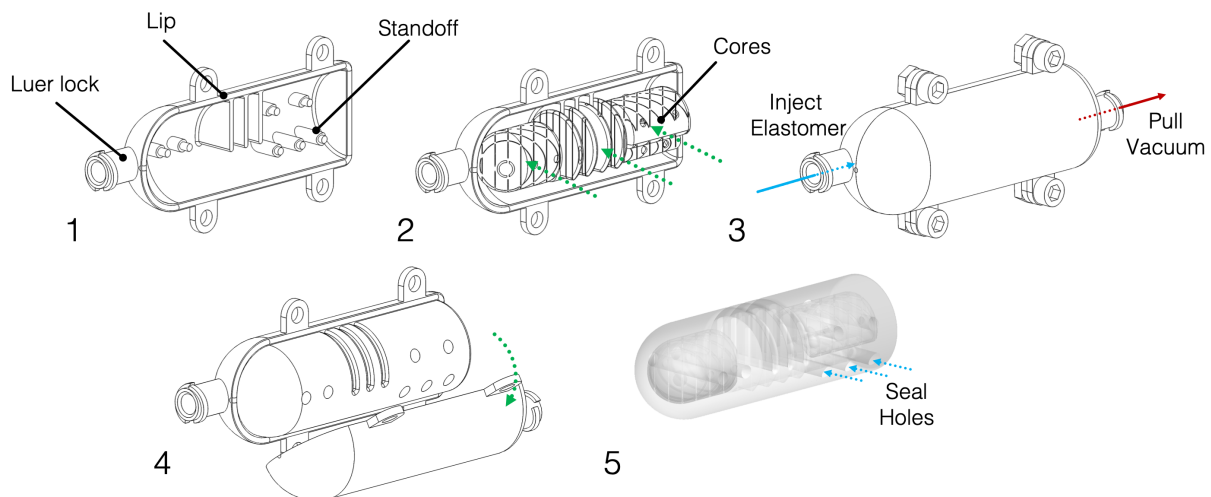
General fabrication steps for negshell casting. 1: The mold is prepared. The Luer lock, lip and standoff features are highlighted. 2: The cores are inserted into one side of the mold. 3: The mold is clamped shut with fasteners and elastomer is injected via a syringe. Another syringe can be used at the other end to pull a vacuum to help with liquid elastomer flow. 4: Once the elastomer has set, the mold halves can be removed. 5: The completed soft robot component.
